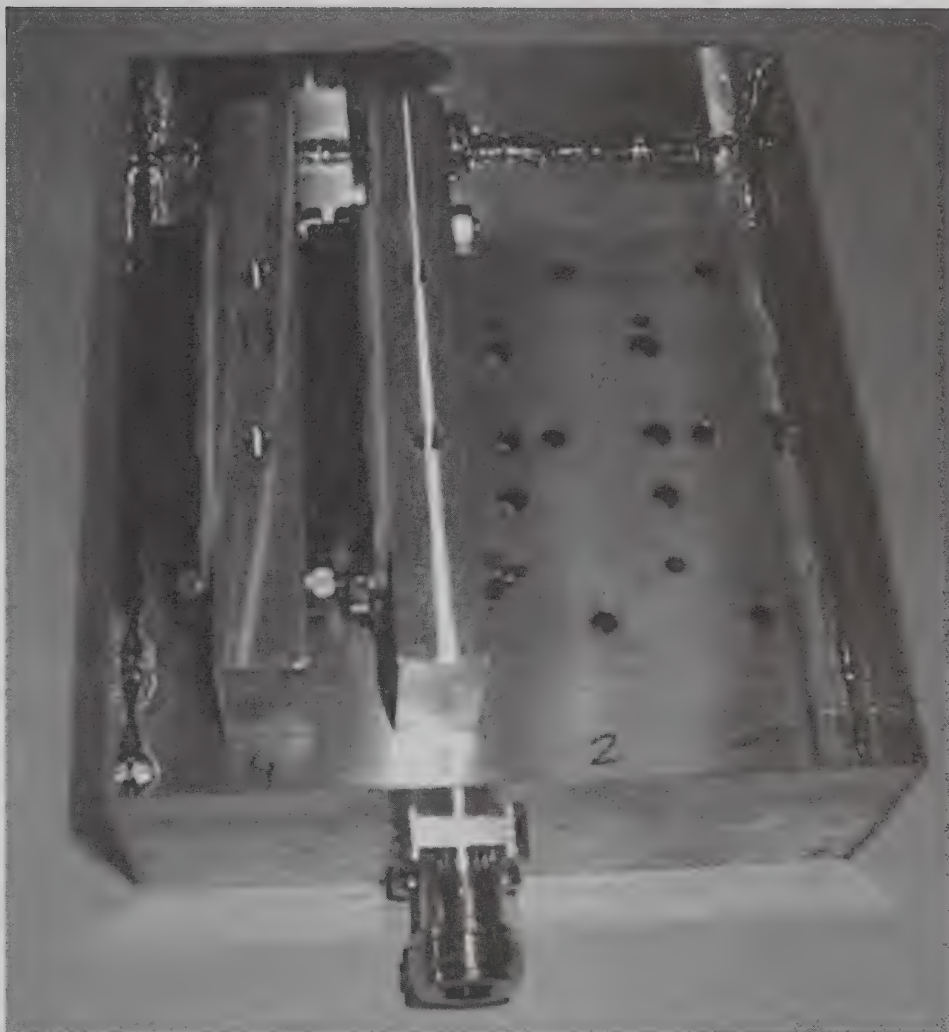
Bottom side of PCB with amps and heatsinks shown.
